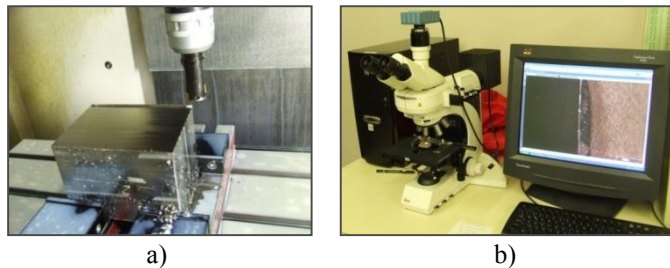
Experimental setup and measurement system for tool wear testing and measurement
